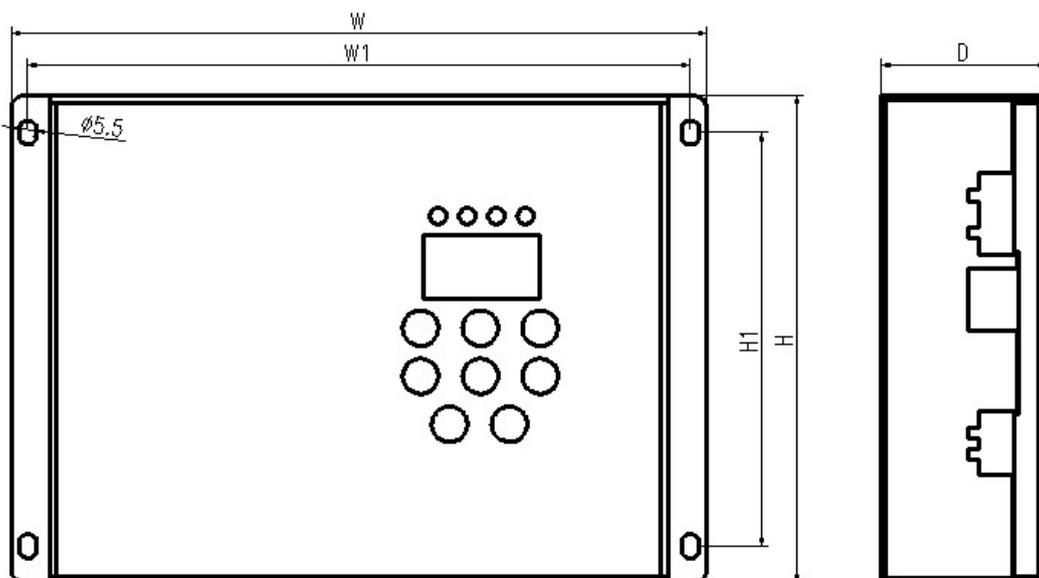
EXTERIOR DIMENSIONS OF S TYPE
